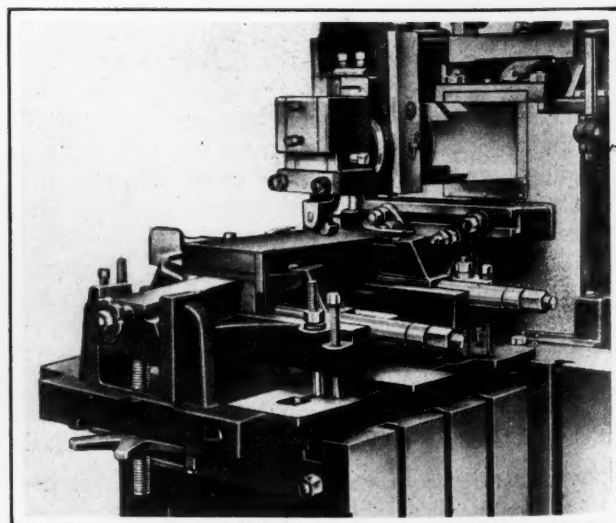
Attachment Designed for Use in Machining the Face Bearing of Shoes and Wedges
